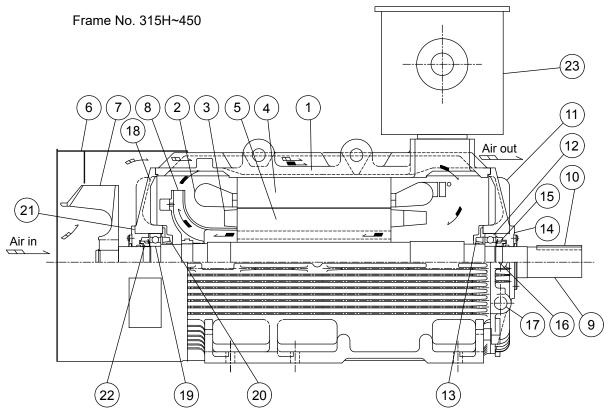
Section Drawing of Horizontal foot mount (Frame size 315H~450)
